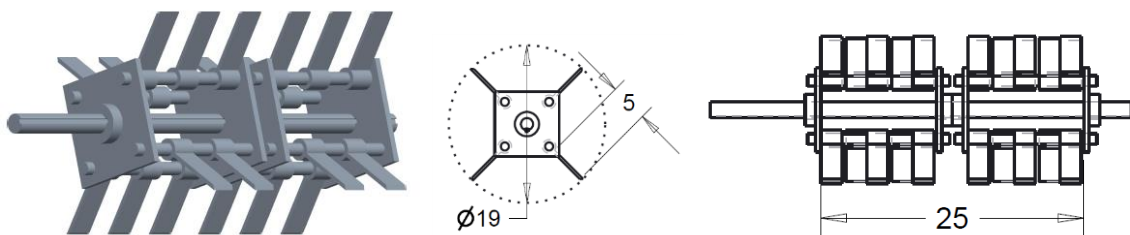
Flail mower with flat blades (left) with side view (center) and front view (right) schematic (all dimensions in inches)
